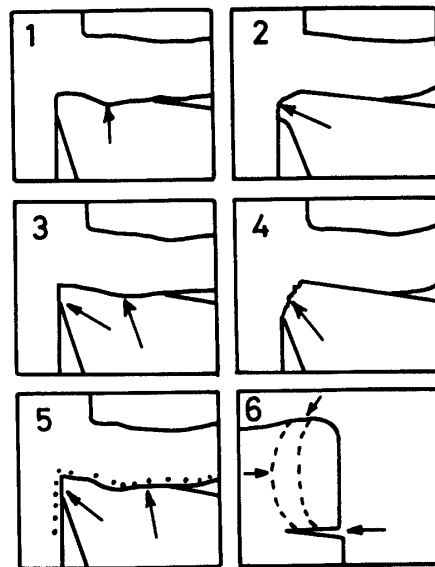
Wear patterns of high-speed-steel tool used for machining SCM 4 steel at the cutting speed of 40 m/min.
